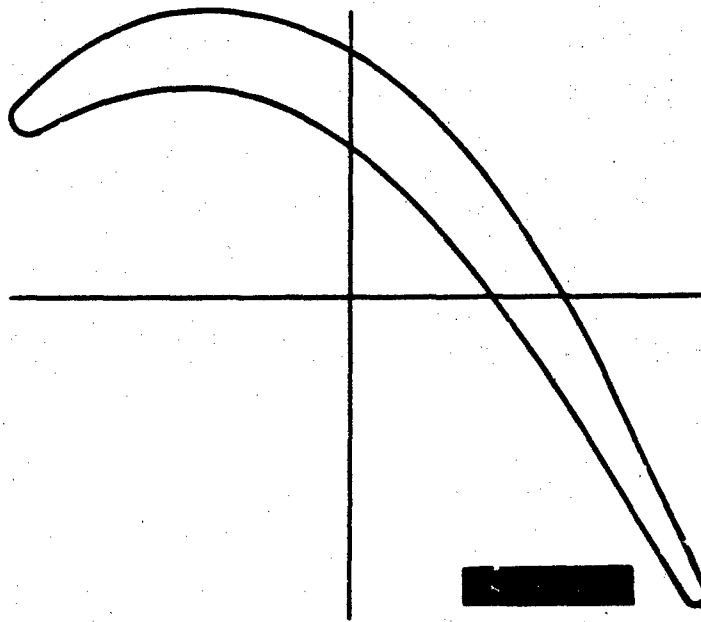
Section D-D, Second Blade 1/4 Tip, Planar
